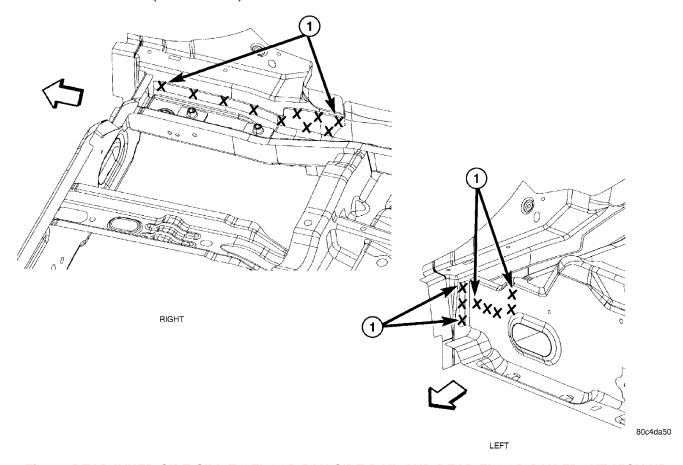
REAR INNER SIDE SILL TO FLOOR PAN SIDE RAIL AND REAR FLOOR PAN FRONT KICK UP CROSSMEMBER
